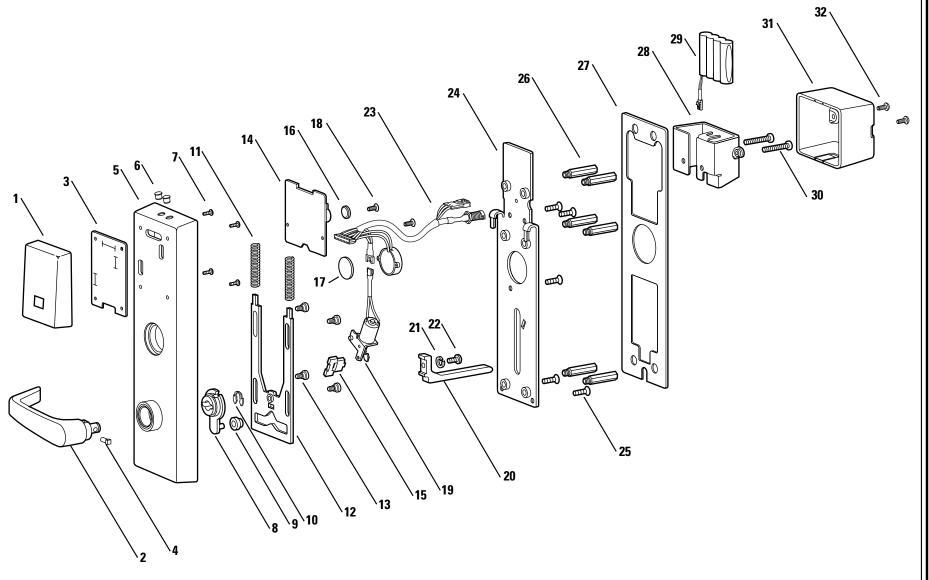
B.A.S.I.S. V proximity reader and trim exploded diagram (Precision Hardware—rim type shown)
